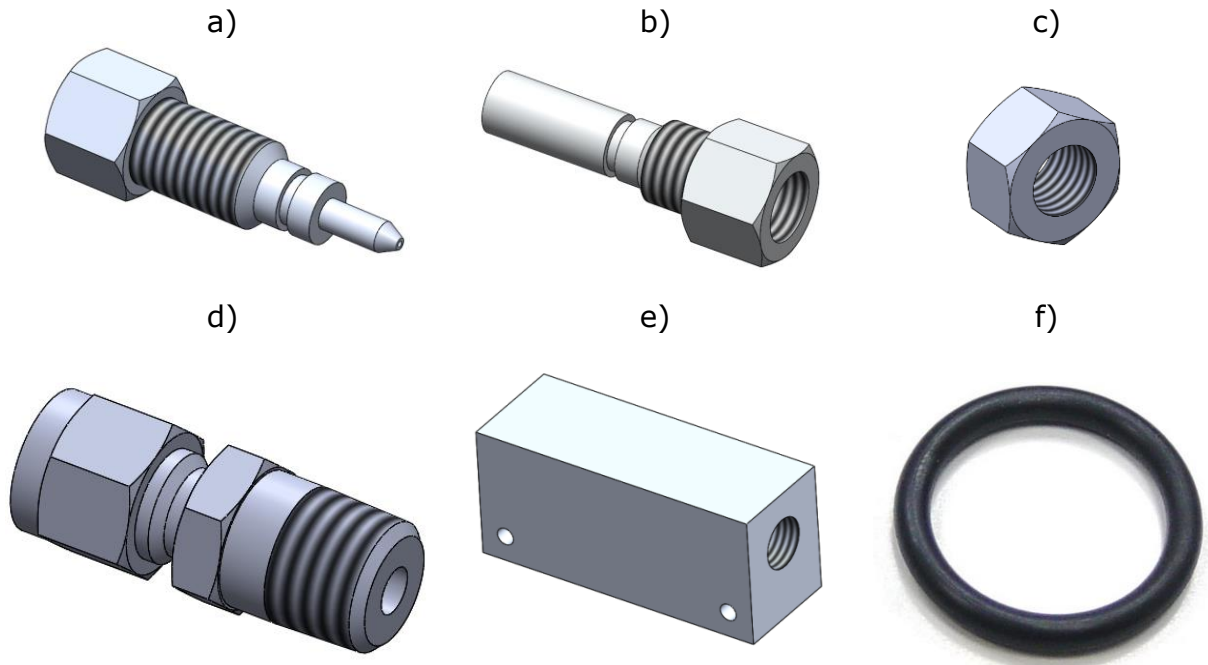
7- Parts of the initial ejector. a) Nozzle b)Outlet c)Hexagonal nut d) Connector e) Body
